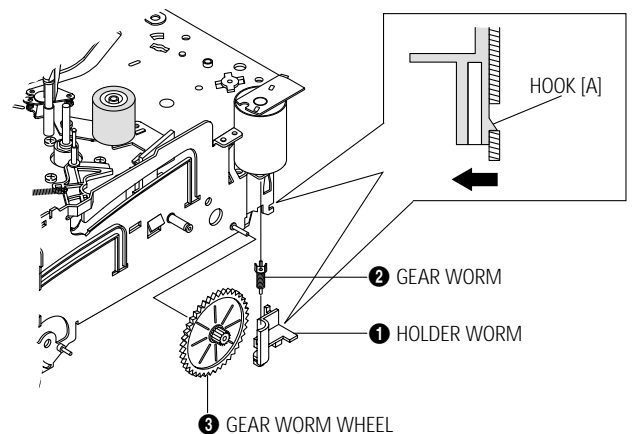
Holder Worm, Gear Worm, Gear Worm Wheel Removal
